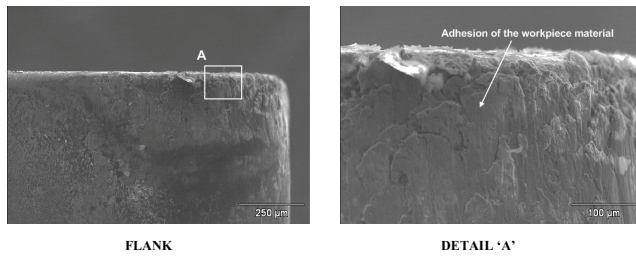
Flank wear land of the cutting edge used to cut L2 alloy at the end of tool life $v_c = 160$ m/min.
